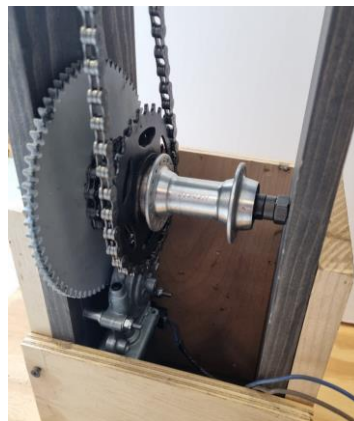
3D Gear Attached to the Bottom Chain Ring
